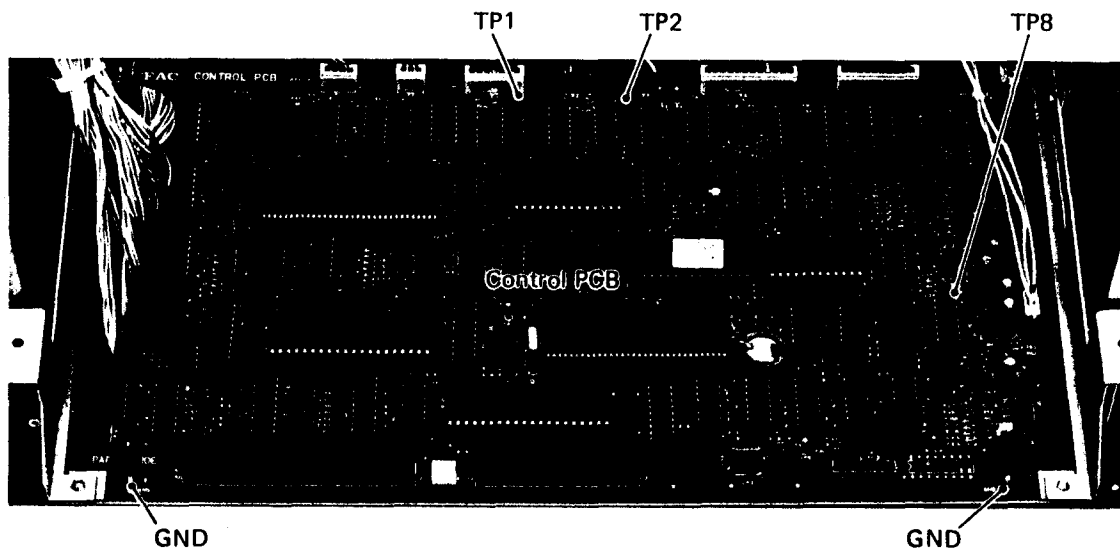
TEST POINTS ON CONTROL PCB ASS'Y
